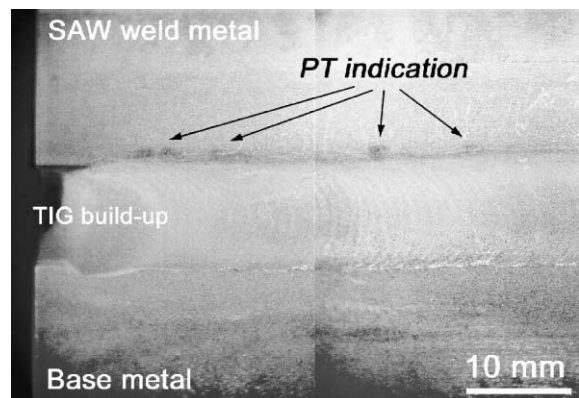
PT result after the 1 MJ/m TIG build-up welding in an irradiated specimen. Helium concentrations are about 0.5 and 1.8 appm helium in the base metal and pre-existing SAW weld metal, respectively.
